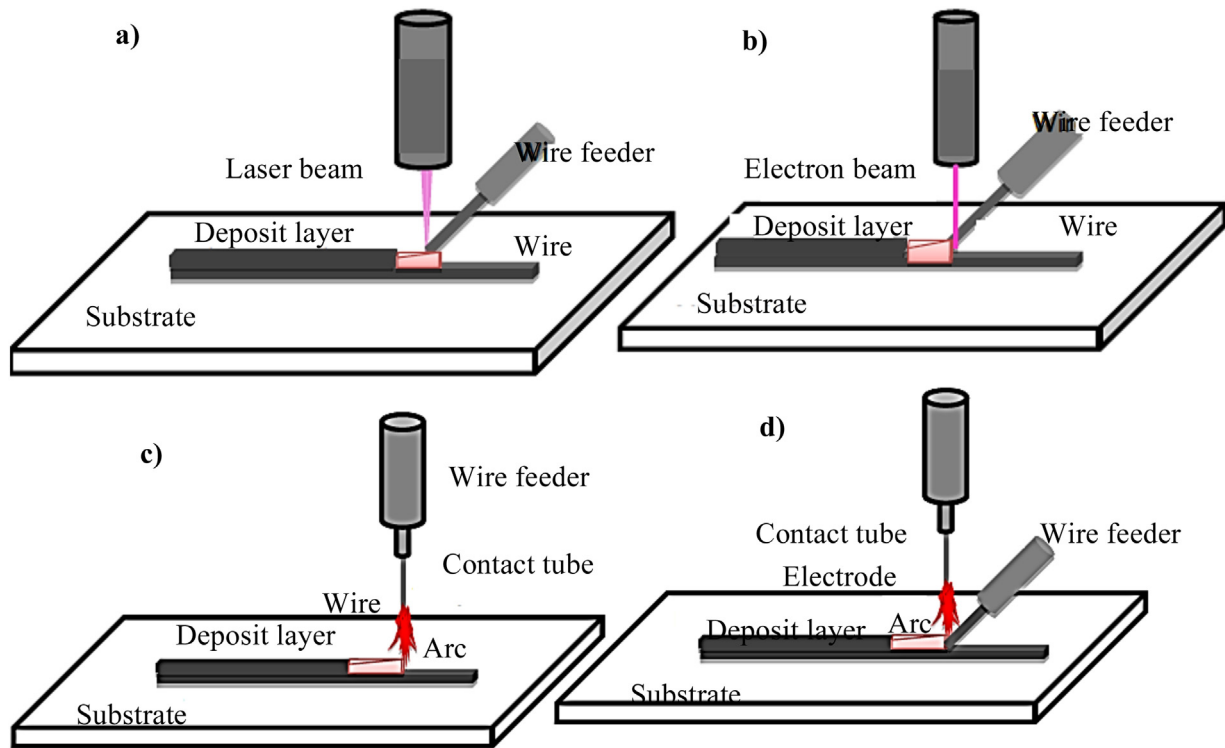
Combination of welding methods with AM: (a) LAM, (b) EBM, (c) GMAW, (d) GTAW [102].
